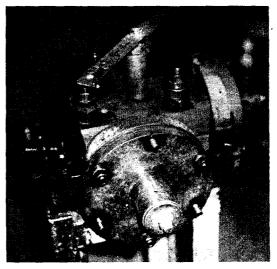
Completed elbow locked in Mould ready for curing in Steam
